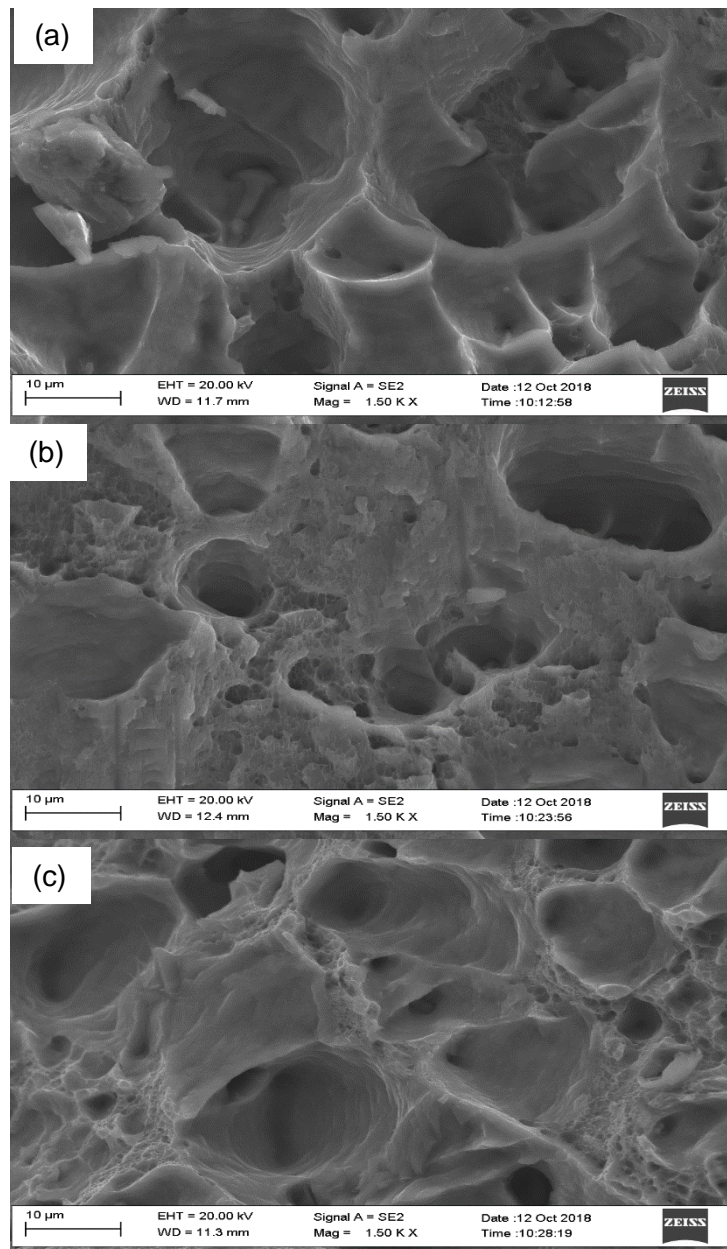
SEM fractographs at the middle of the weld for specimens (a) M4, (b) M5 and (c) M6
